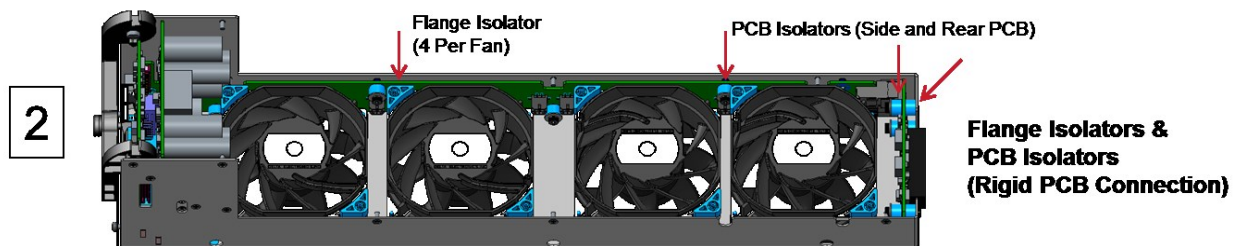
GEN2A with AHBM Test Case #2: Flange & PCB Isolators (Rigid PCB)
